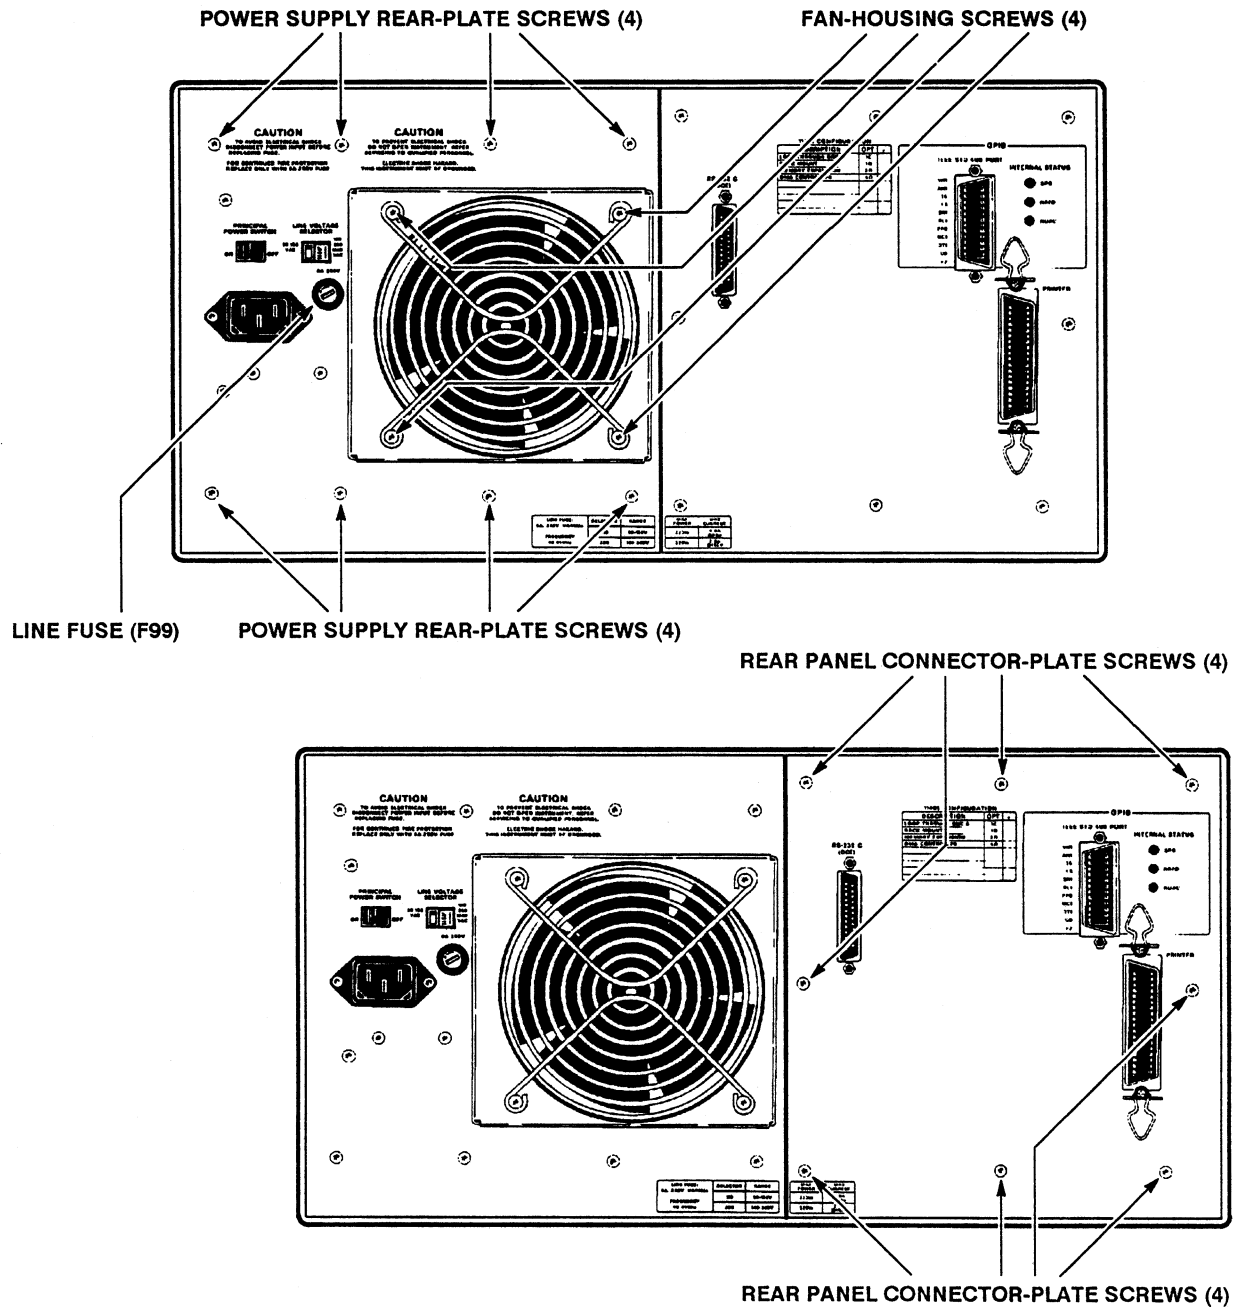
Removing the Power Supply Rear Plate, Fan Housing, and Rear Panel Connector-Plate
